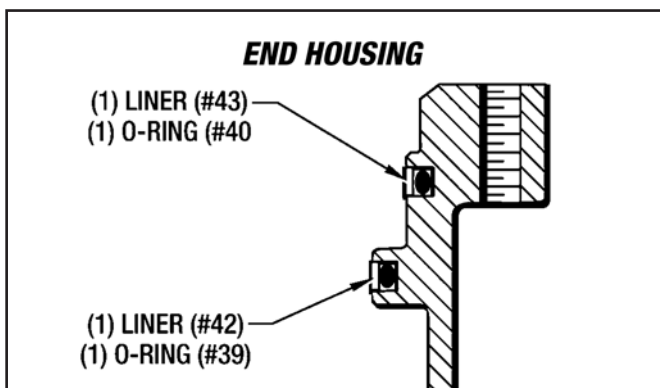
Installing Piston Seals in End Housing (#9)
